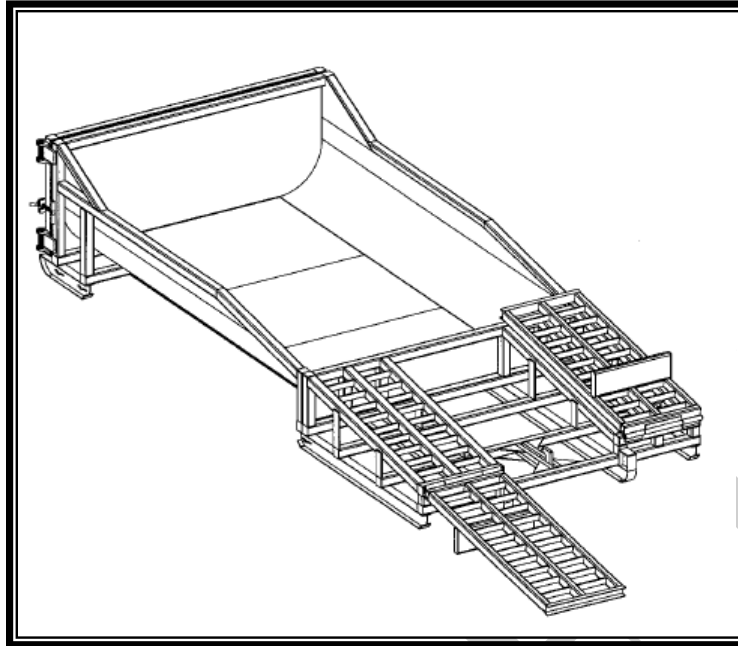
Prefabricated Concrete Washout Container with Ramp
